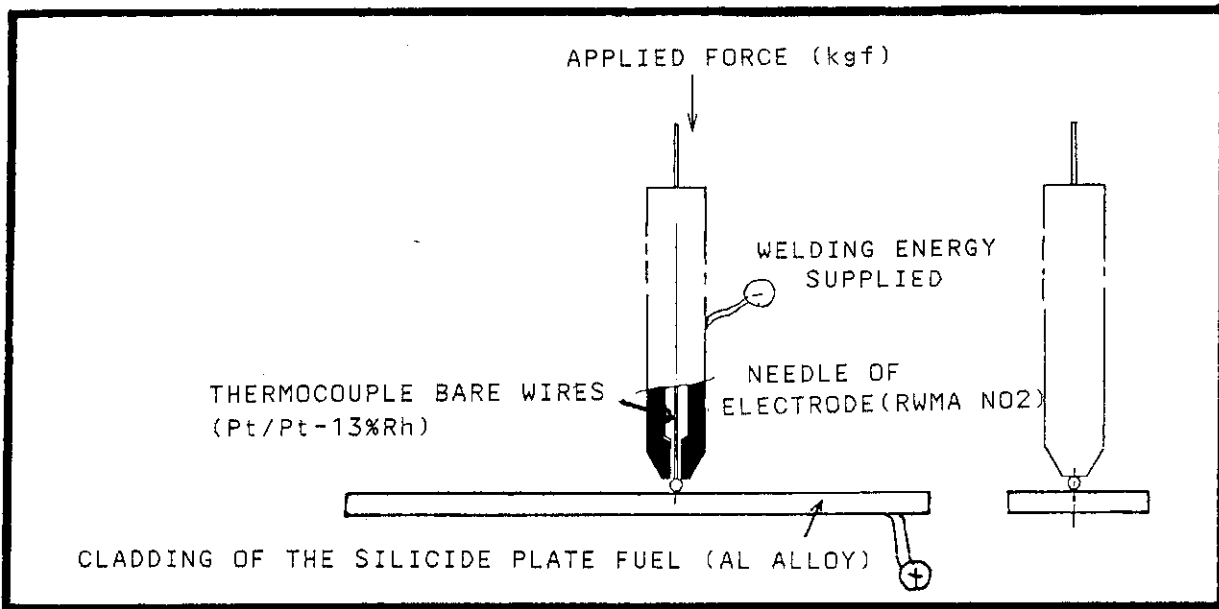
Nail head method for the welding of Pt/Pt-13%Rh bare wire.
